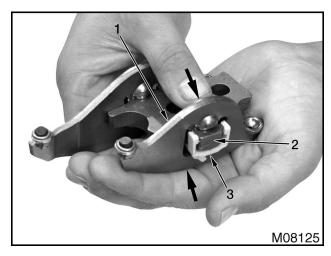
Separation of rocker arm assembly from dual rocker fulcrum plate (typical)
